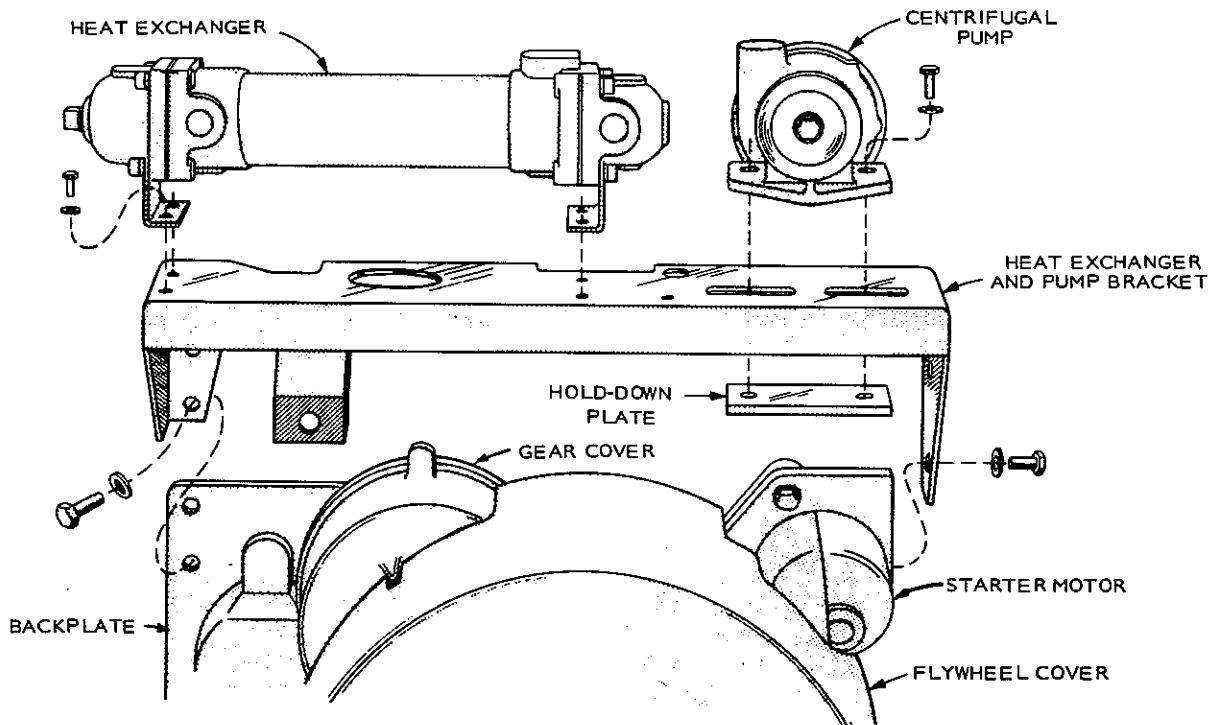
WATER PUMP MOUNTING BRACKET
